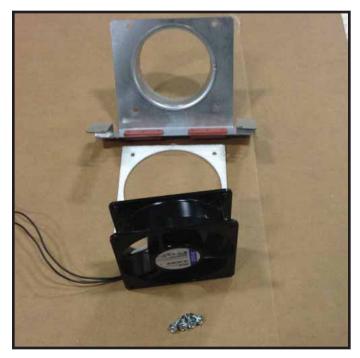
Blower, Gasket Mounting Bracket, and Hardware
